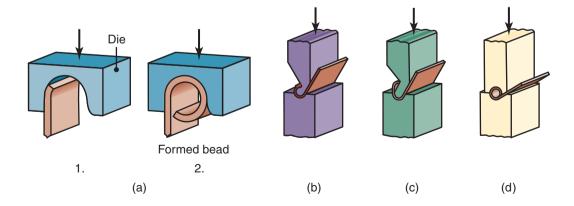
(a) Bead forming with a single die. (b) through (d) Bead forming with two dies in a press brake.
